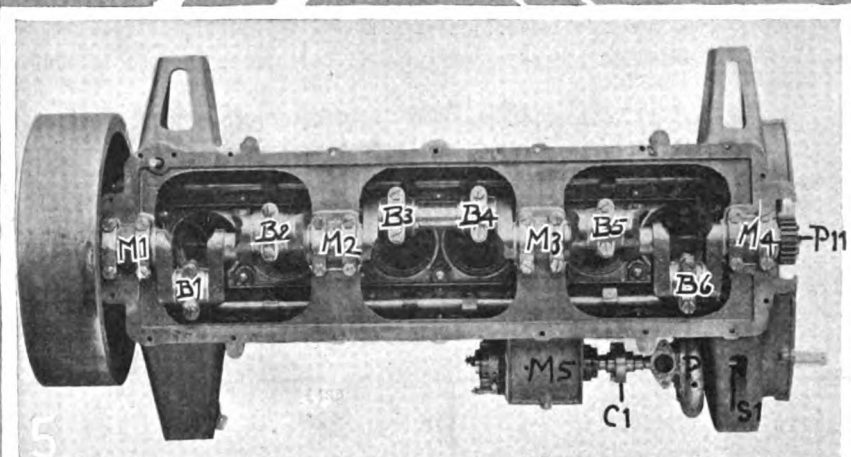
Six-Sixty motor turned upside down, with lower half removed
